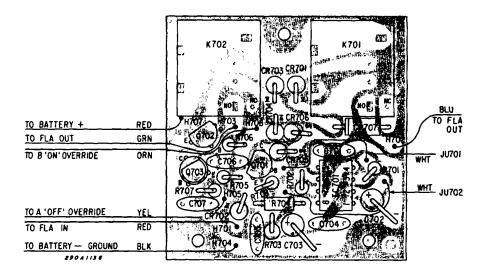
Control Module Optional Flasher Circuit Board Parts Location Diagram
